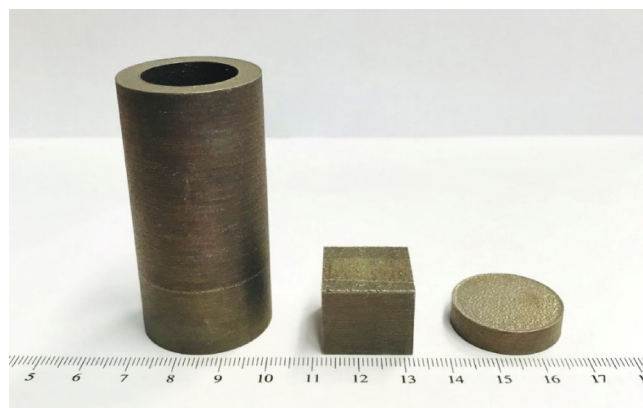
Photo of three SLM maraging 18Ni-300 steel products manufactured using the optimized parameters.
